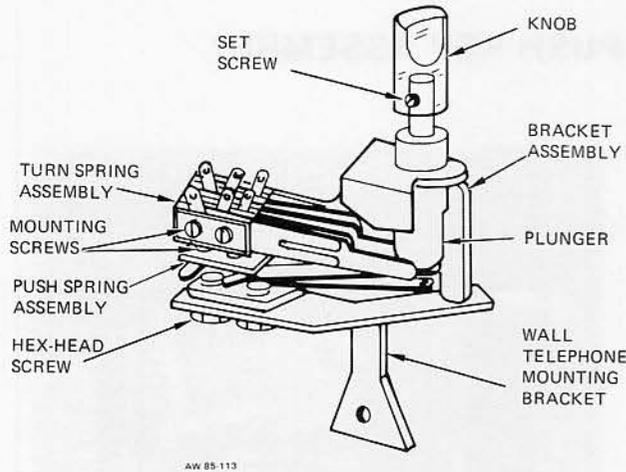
Model 79453 Turn-And-Push Key Assembly, Component Locations
